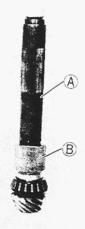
(A) Special tool (Bearing installer attachment 09924-74510)
